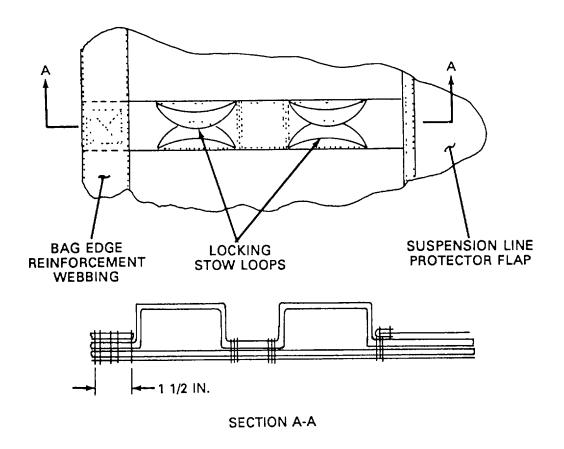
Cotton Deployment Bag Locking Stow Loop Alteration Details.
